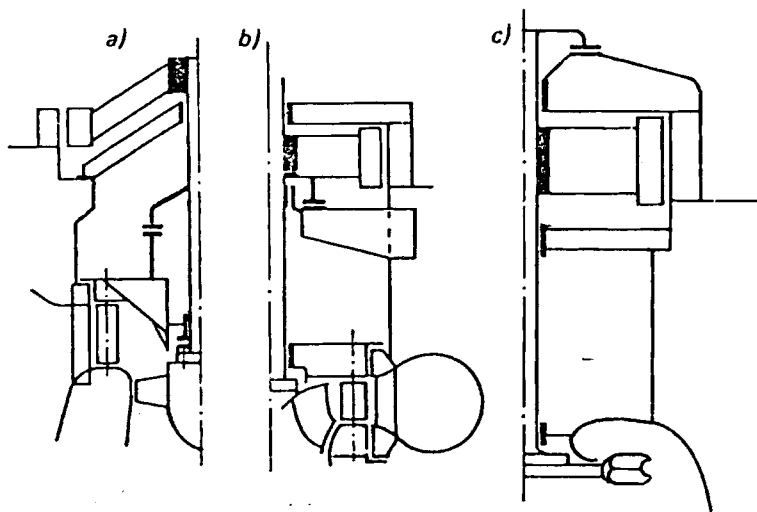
Principal bearing arrangements. a) 2 Radial bearings, both the rotors of overhung design, thrust bearing on the head cover. b) 3 Radial bearings, thrust bearing on the pit. Variants: middle or upper radial bearing omitted. c) 3 Radial bearings, thrust bearing on the generator stator.
